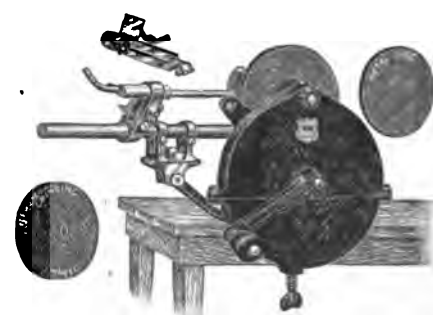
The McCullough valve refacer. Will reface hard tungsten valves and other kinds. Cutting surface is carborundum cloth, glued to steel discs, an emery wheel is furnished with the outfit, also a valve reseating tool as shown in fig. 8, (write B. L. Fry Mfg. Co., St. Louis Mo. for descriptive folder).
